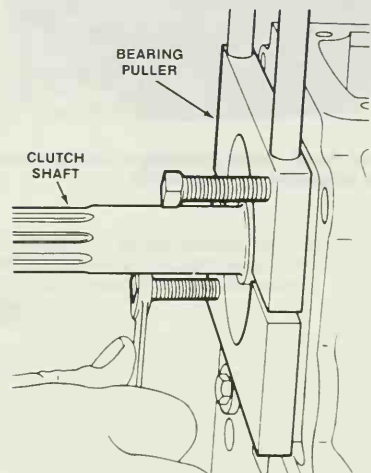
Clutch shaft is removed with a puller. (American Motors Corporation)
